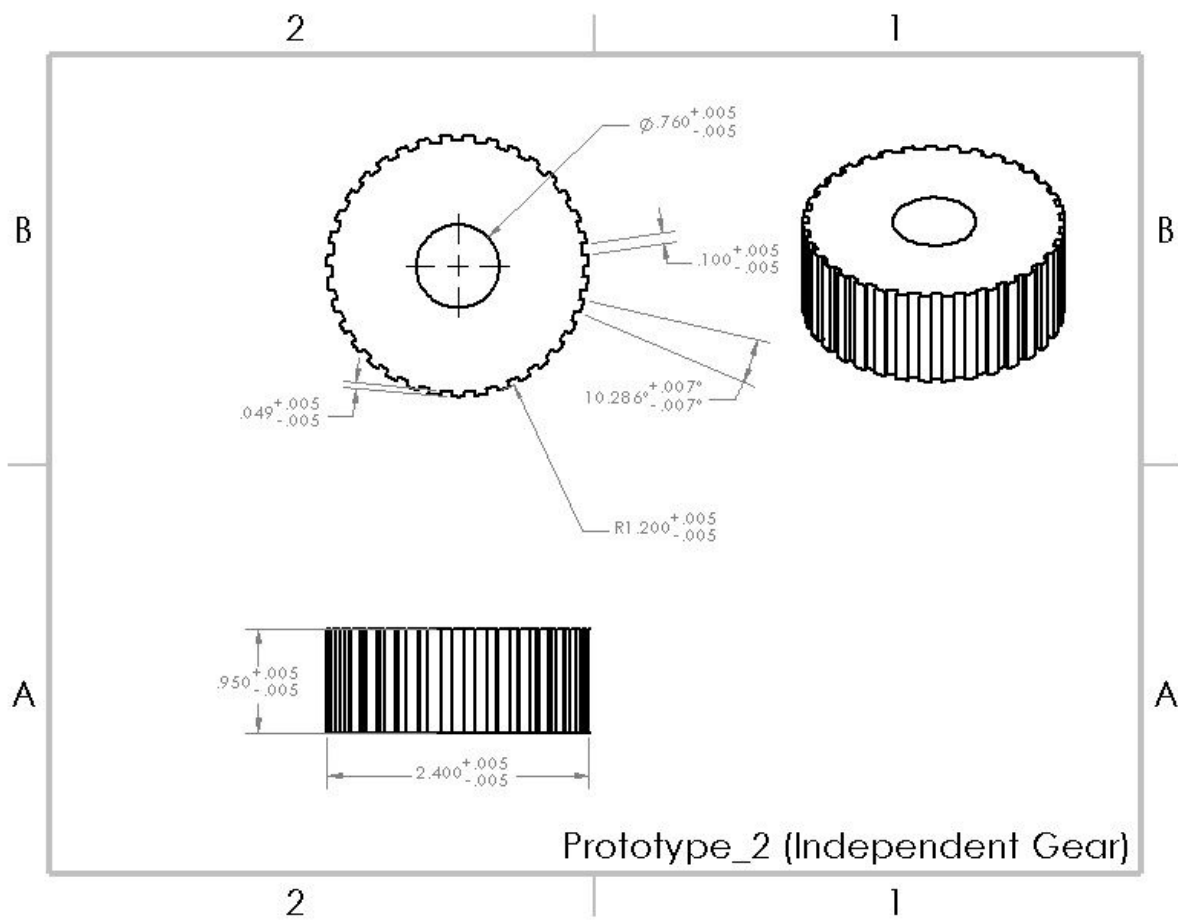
Solidworks 2D Prototype Independent Gear Drawing
